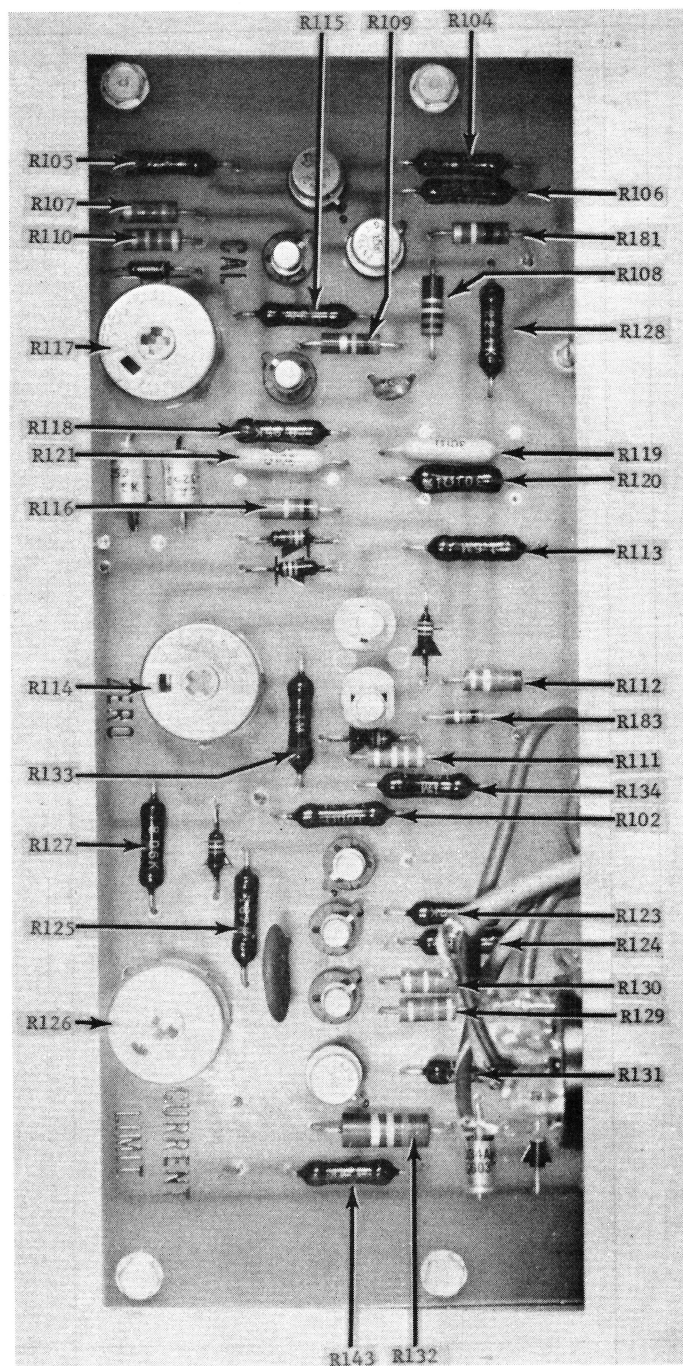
Resistor Locations on Front Section of Printed Circuit Board PC-117. For other component locations see Figure 18.
